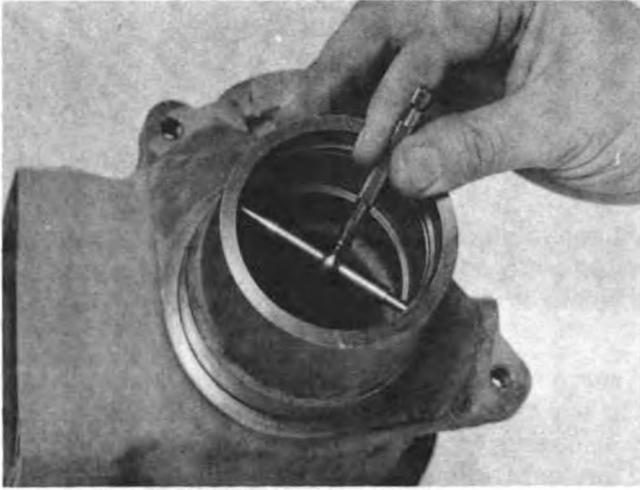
(N10866). Measure The Bore In The Housing.
